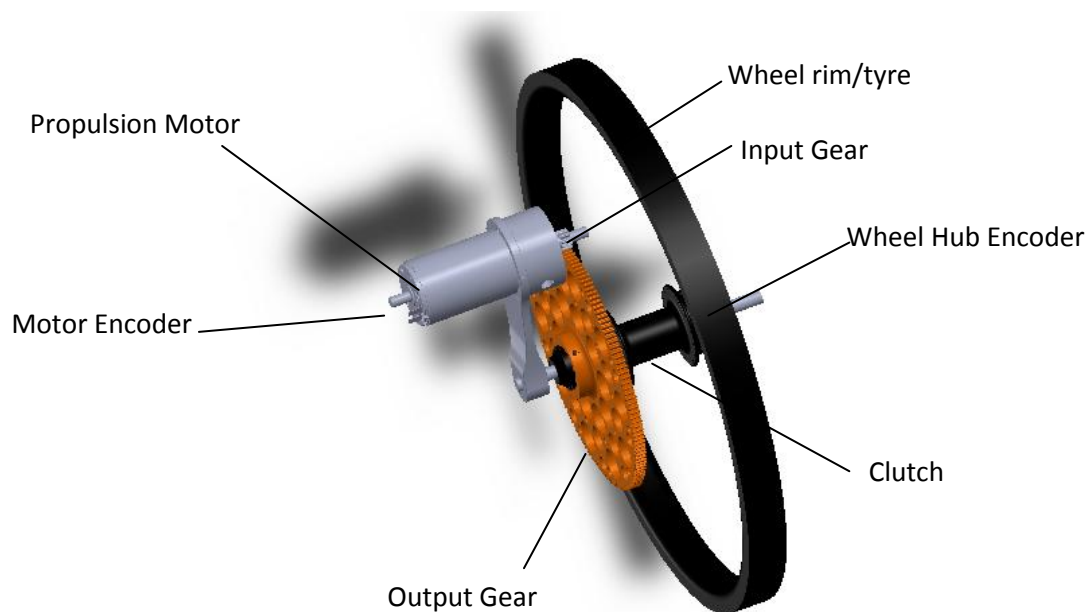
CAD model of vehicle drivetrain integrated on to rear wheel
